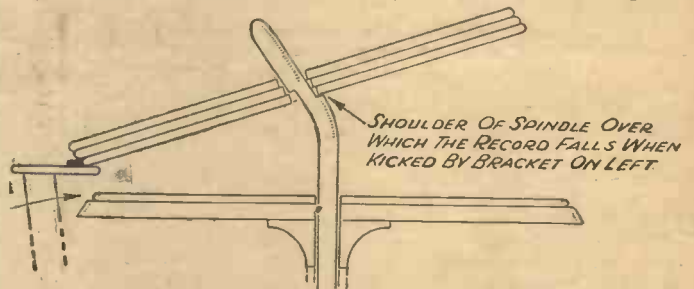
Diagram showing the principle of operation of the latest Garrard mechanism. The little pegs on the arms of the bracket shown on the left cause the bottom record to be shifted slightly to the right, thus passing over the shoulder of the spindle.
